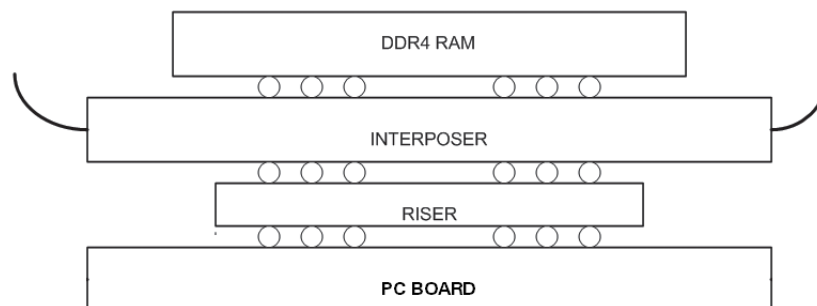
PC board, riser (or optional Grypper socket), interposer, and DRAM stack up
